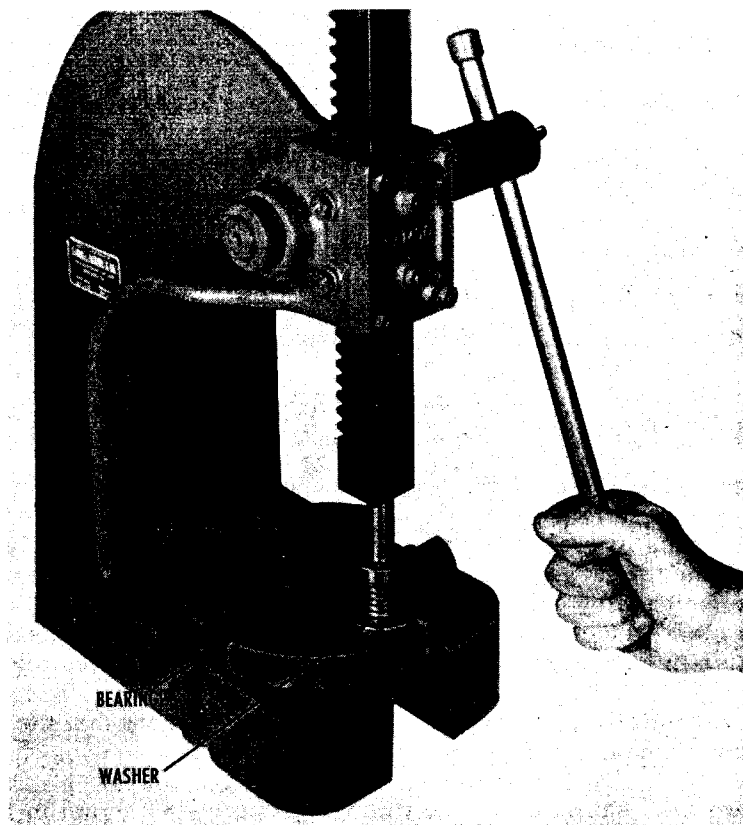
RIGHT DRIVE SHAFT BEARING INSTALLATION
